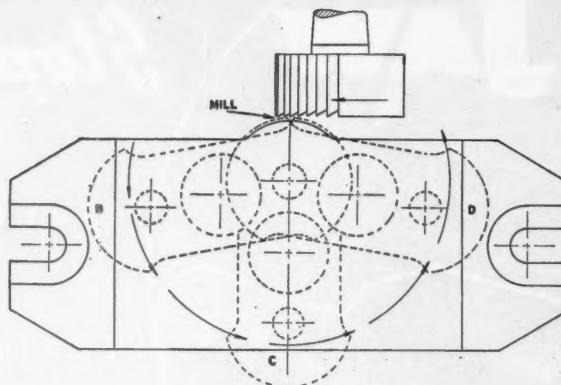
Drawing showing simple design of "Swing" Milling Fixture in which the arc-ends on the workpiece shown in Fig. 41 are finished.
